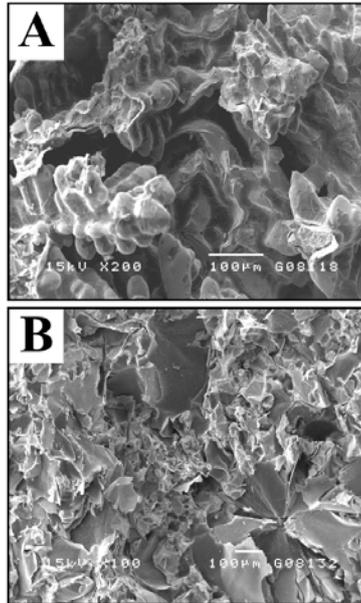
Tensile fracture surfaces of the mold wall thickness of 0.7 inch.
